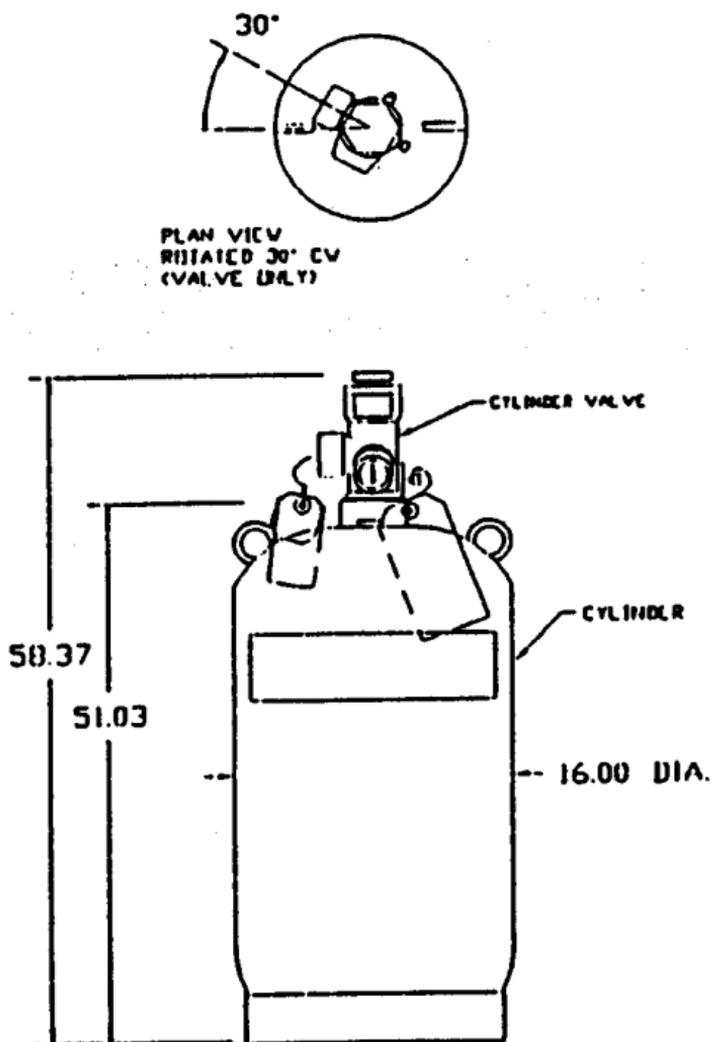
Halon 1301 Cylinder/Valve Assembly,
